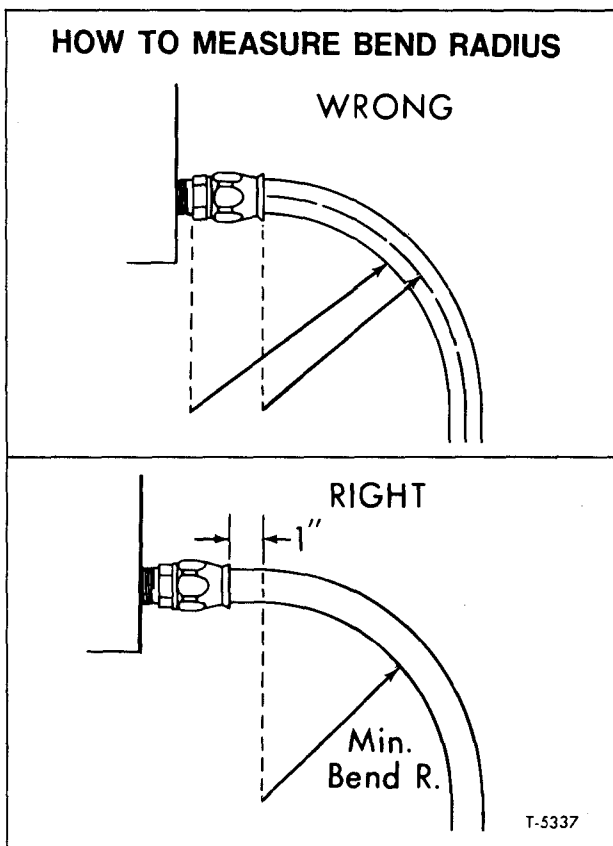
Installation of Teflon Hose to Insure Proper Bend Radius
